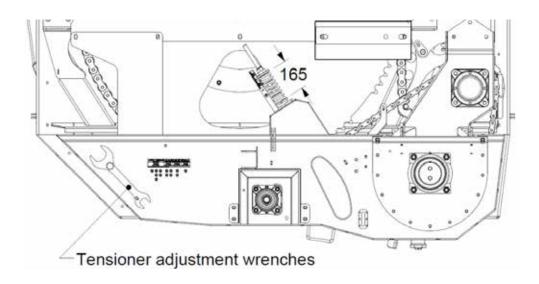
Storage position of Tensioner Adjustment Wrenches & Primary Chain Tensioner Spring setting
